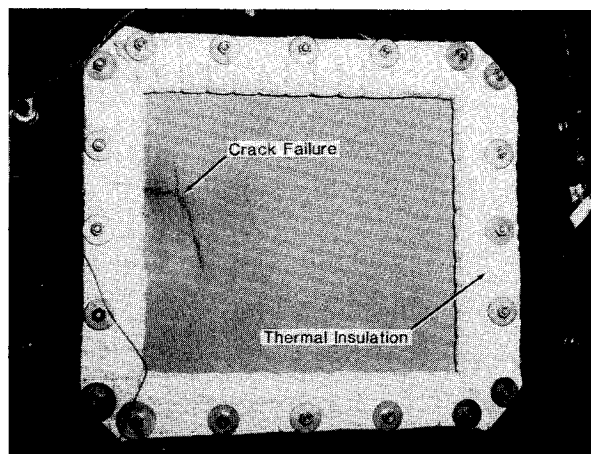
Sonic fatigue failure of flat c-c panel tested at room temperature.
